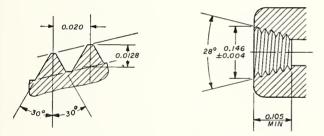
Thread details for shutter cable release tip and socket with taper (European) thread (50 tpi).
